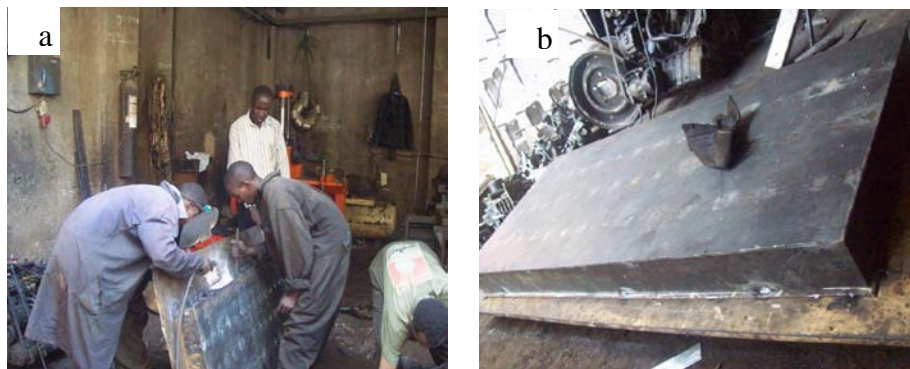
Welding of the rear sides of the optical table and the bottom plate: (a) welding of bottom plates onto honey comb structures; and (b) completely welded optical table.
